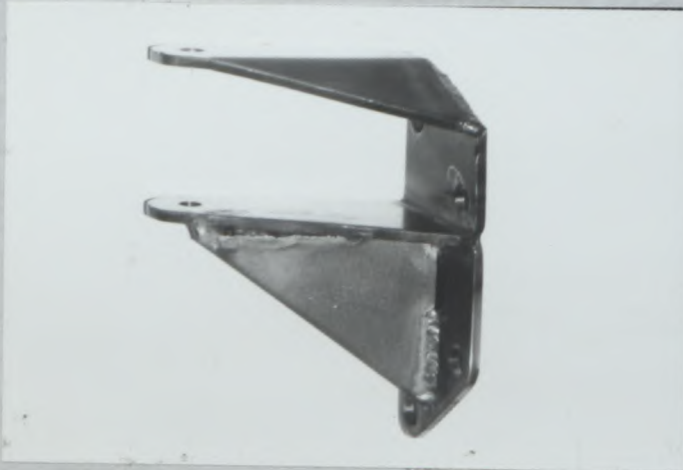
REINFORCED STEERING ARM TYPE B
